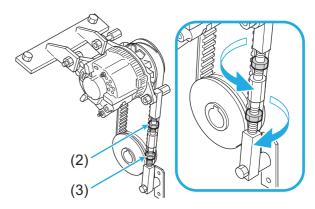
Belt Tension - Adjust (Lock Nut)
